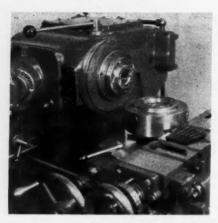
Turret Lathe equipped with 6-Inch Type Al American Standard Lathe Spindle Nose, showing the mating with a 10-Inch American Standard Chuck.
